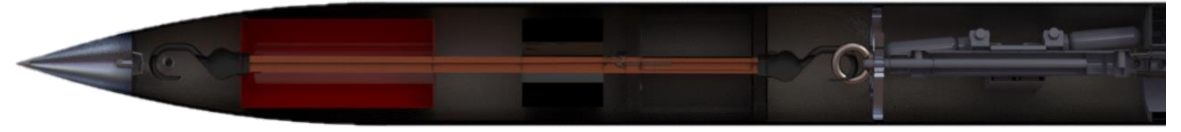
Parachute Section View, Drogue and PAYLOAD Parachute Detailed CAD.
